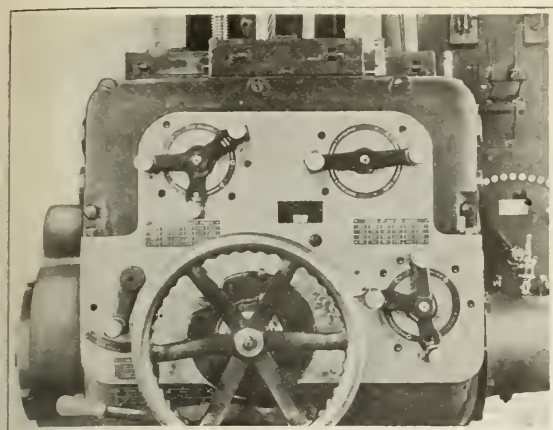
Saddle of the Landis Boring, Milling and Drilling Machine
